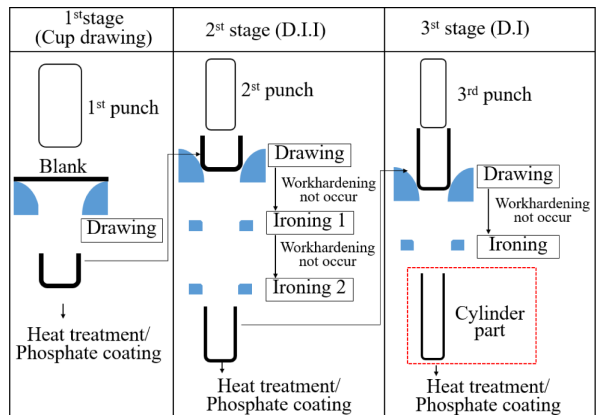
D.D.I. process to manufacture the liner of CNG pressure vessel
